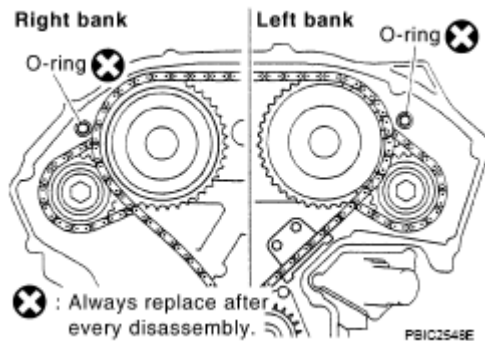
Identifying New O-Rings On Rear Timing Chain Case
